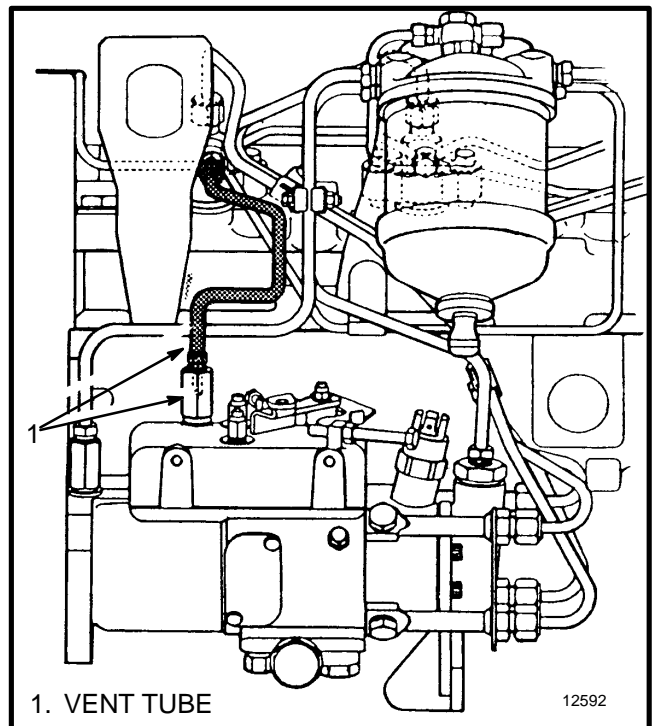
FUEL INJECTION PUMP WITH VENT TUBE
